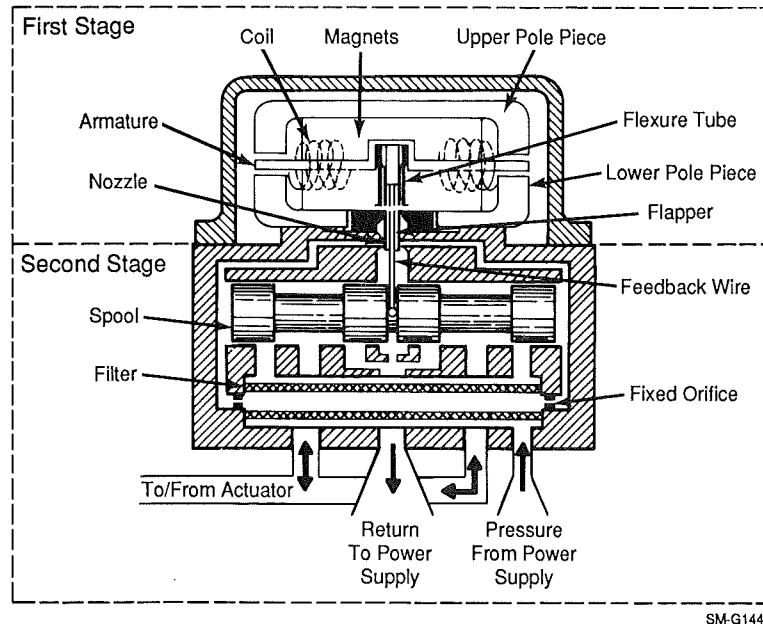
Typical Series 252 Servovalve – Cross-Sectional View
